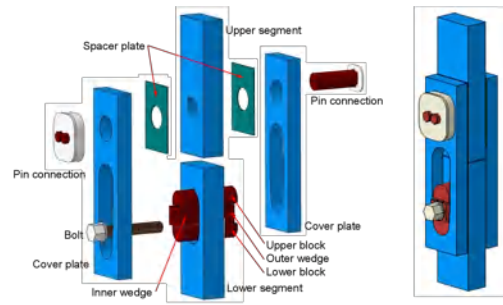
CAD graphs of the C1 Wedge Connection: left in an explosive view, and right in an assembly view.
